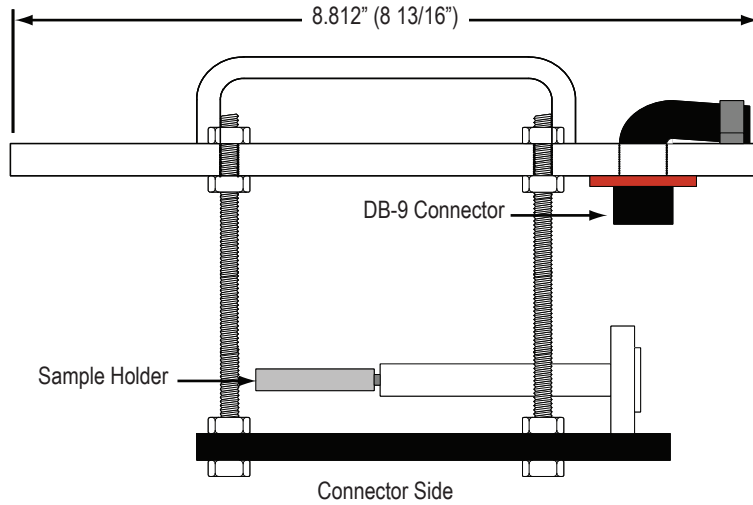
Front view of the vapor chamber lid with the sample holder/heater assembly and DB-9 connector.
